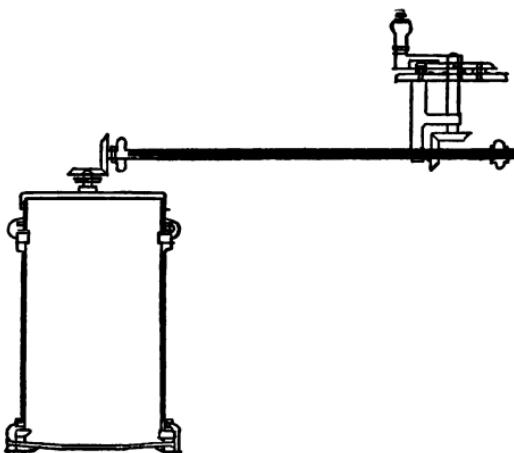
Arrangement for operating a machine tool controller from the tool carriage of a lathe.
